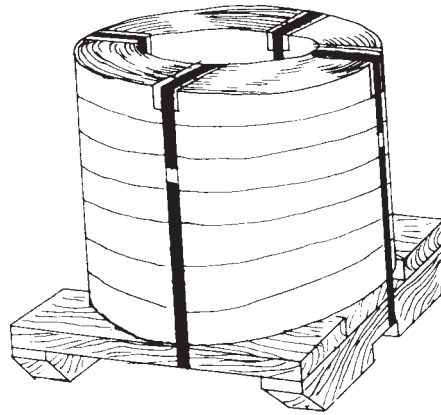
Suitably Packaged Narrow Stainless Steel Strip Coils on Skeleton Platform
